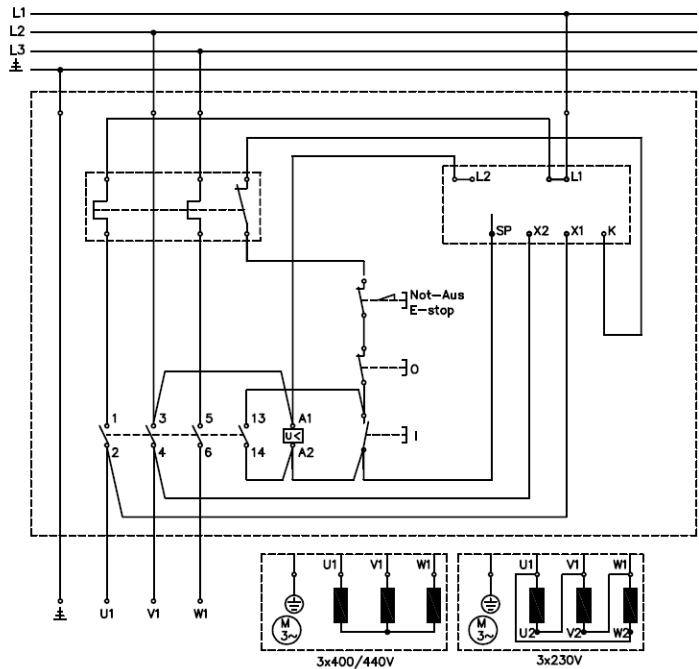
Diagram of belt grinder with brake and no exhaustmotor.
